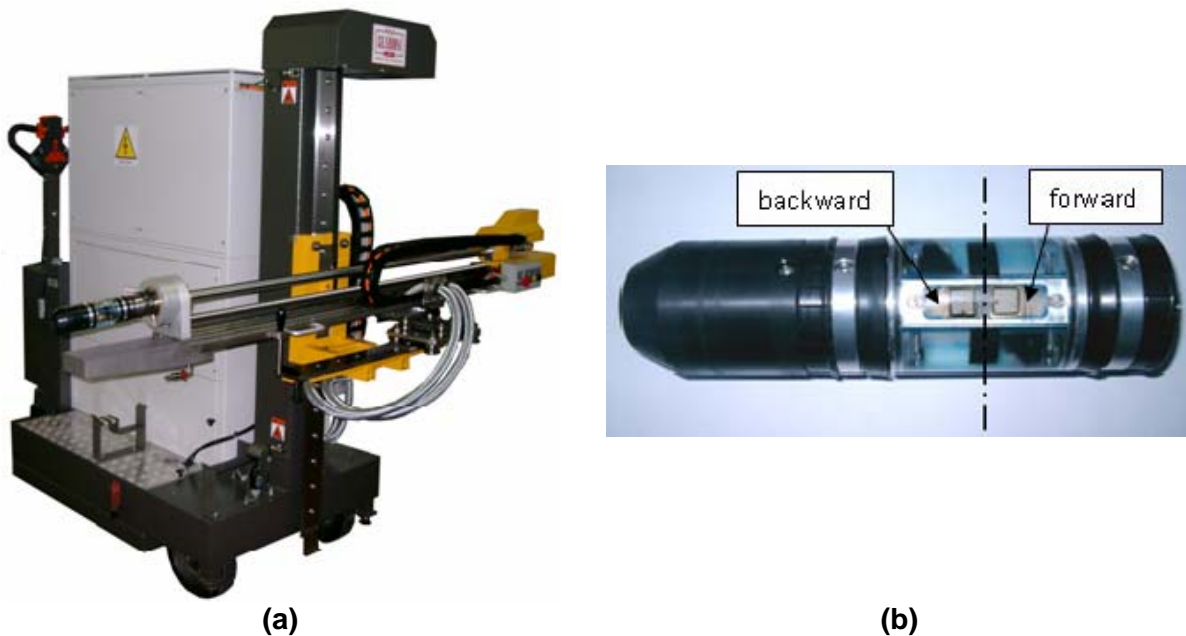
“Bore Axle Testing” system (a) and its probe-holder (b).
